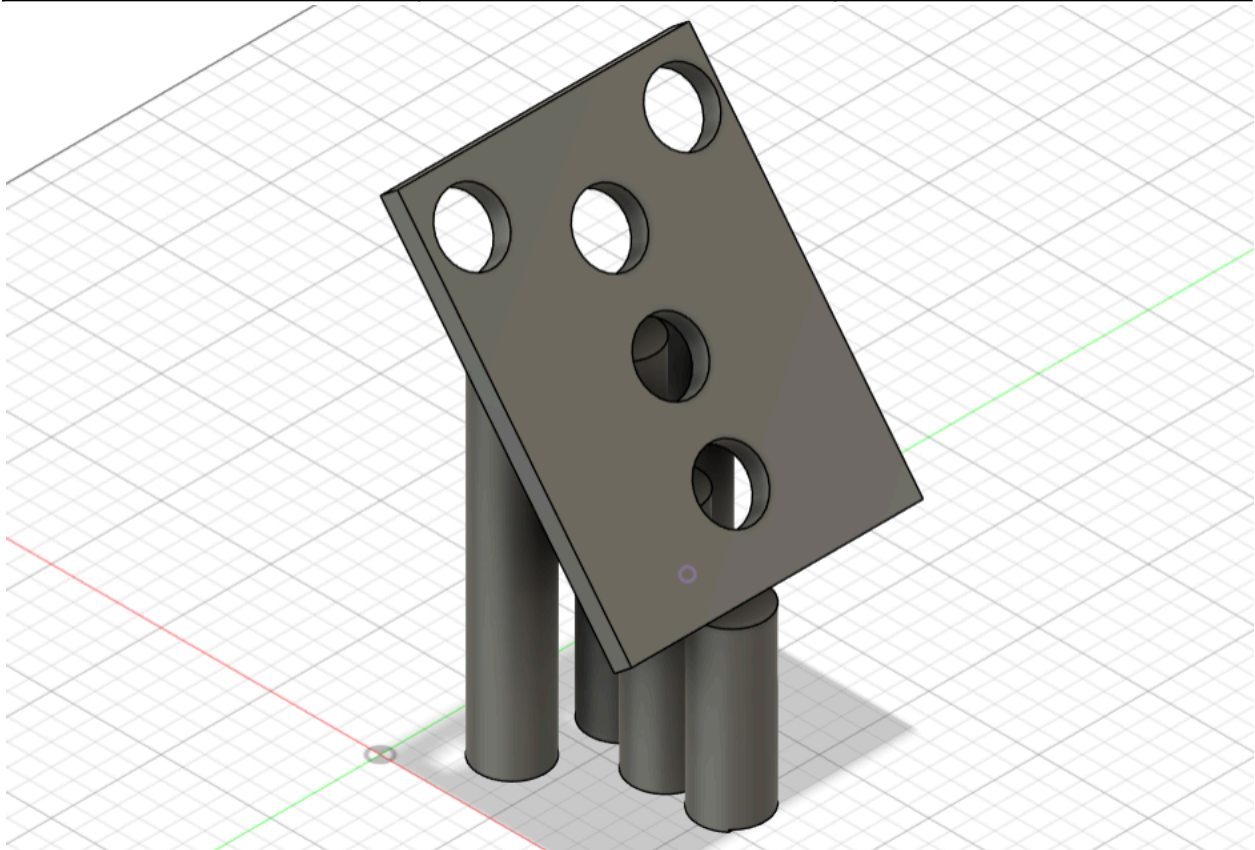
Electronic Skee Ball Machine Internal Ball Collection
